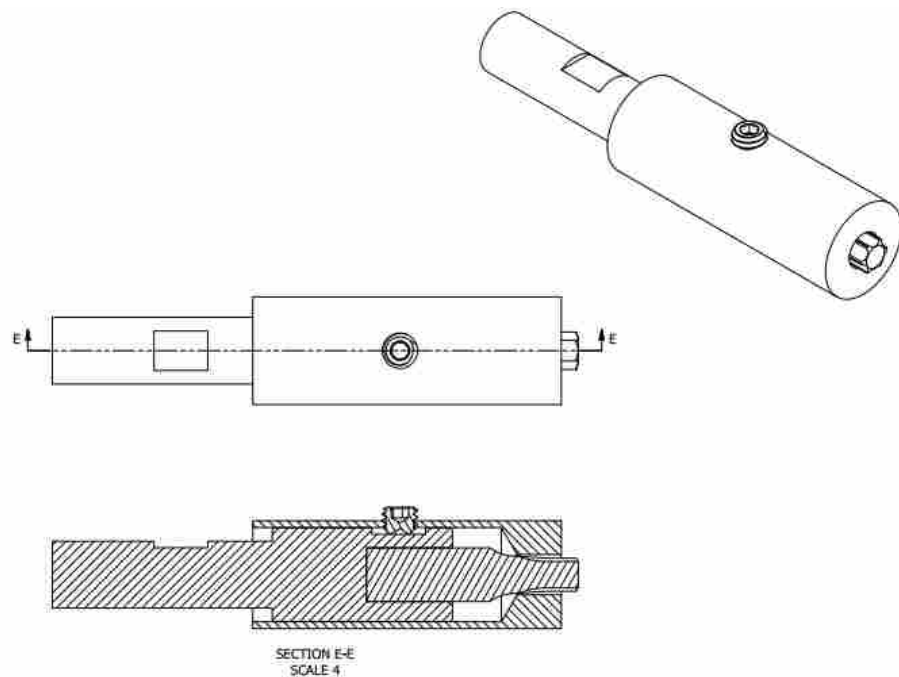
Modified Tool Holder with Bit Driver in Place and a Cap Installed
